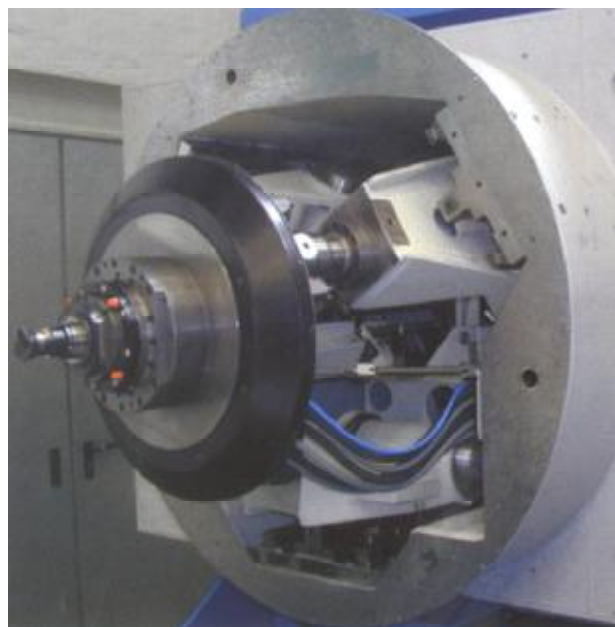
Cincinnati Machine and DS Technologie GmbH (DST)
